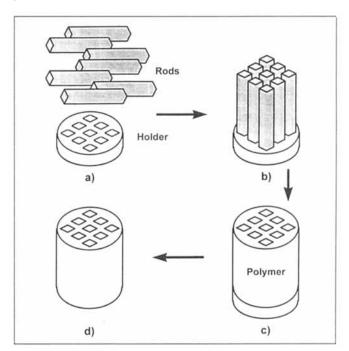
Rod placement ("pick and place") technique for formation of 1-3 composites.
